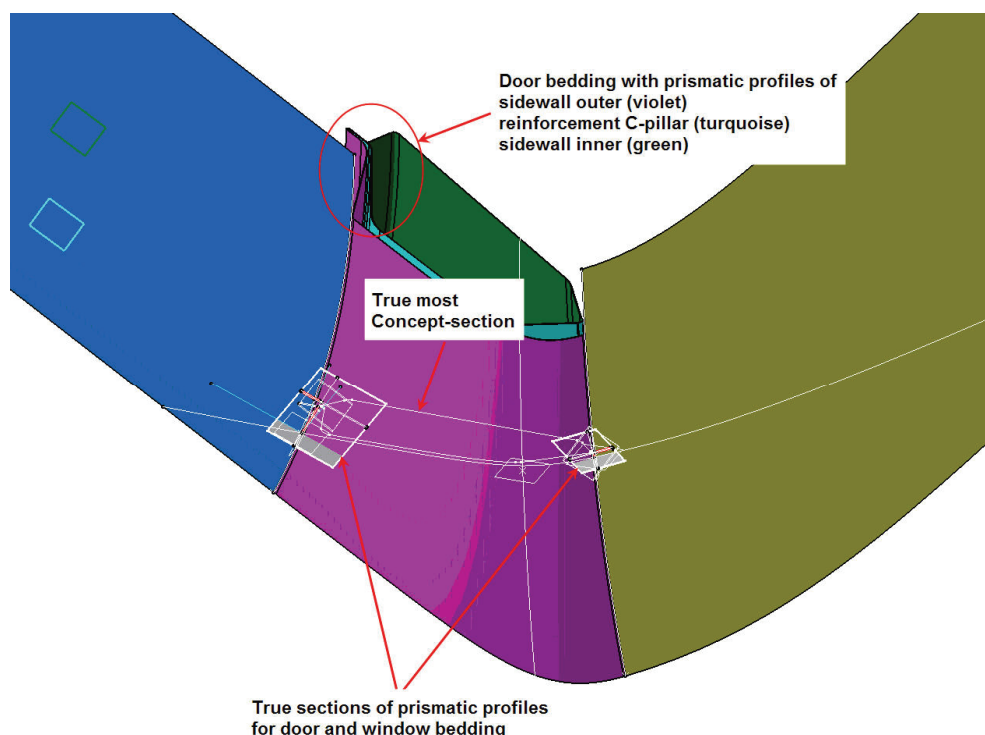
Example workbench “C-pillar” with true most concept section and two prismatic bedding areas.
